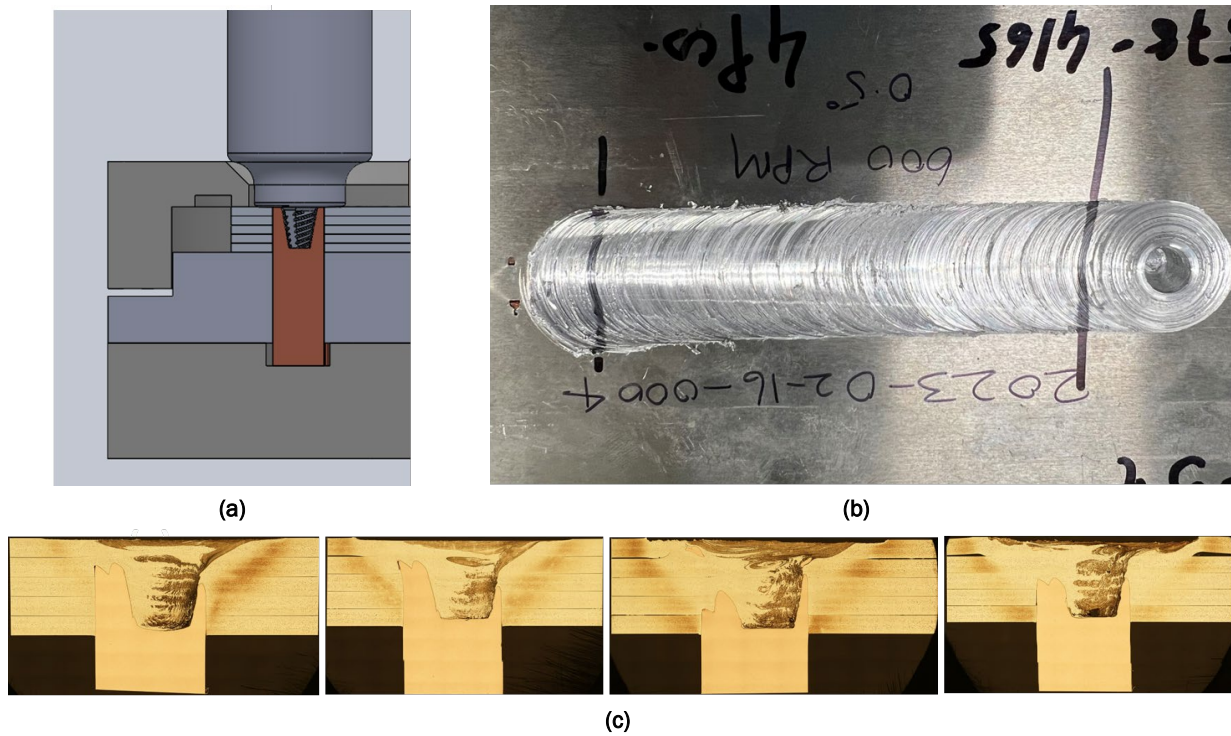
(a) Cross-sectional view of mock end-cap setup for a single-pass FSW to join the Al end-cap to a Cu shorting bar. (b) Crown surface showing a linear FSW joint using single-pass. (c) A series of 4x lines of transverse cross-section images showing defect-free joints. Source: PNNL.
